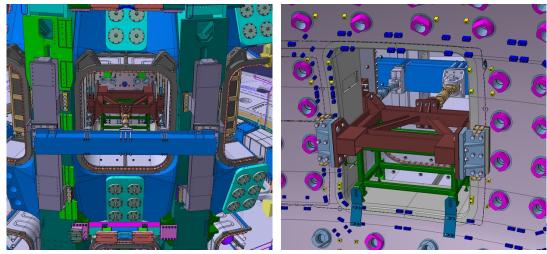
Inboard Bracing Arms and Outboard Frames
